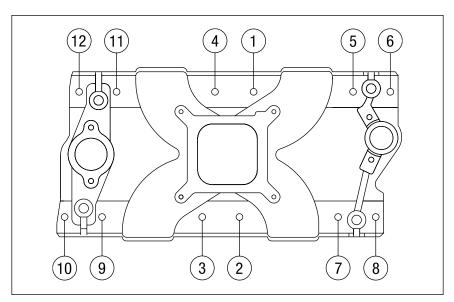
Manifold Bolt Torque Sequence Torque Bolts to 25 ft/lbs.
